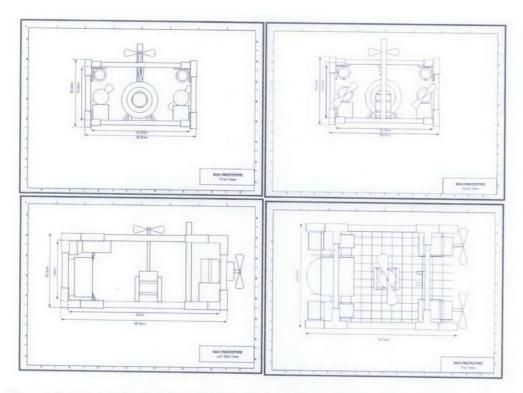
Prototype Schematic Drawing; Front, Back, Side and Top View
